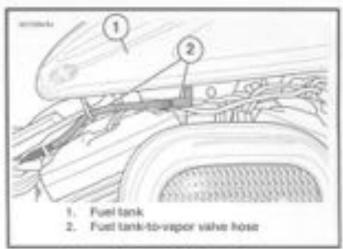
, Fuel Tank Venting System (Right Side View with Seat Removed)
